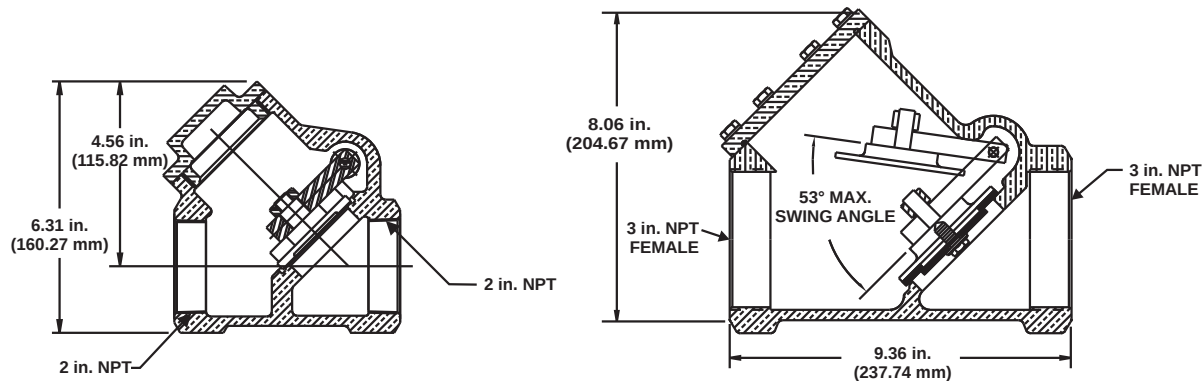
2 in. and 3 in. Swing Check Valves
